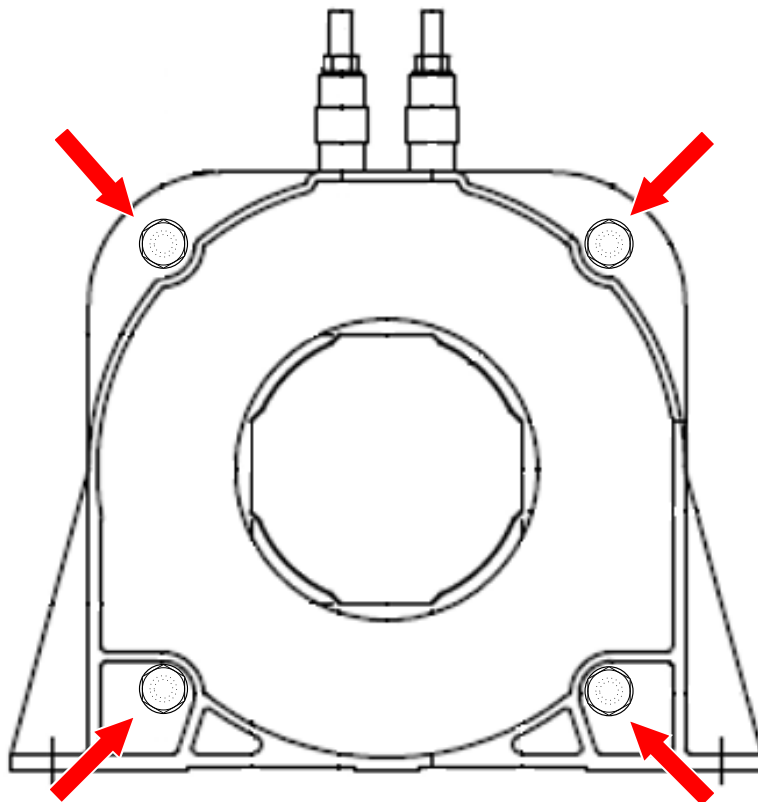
Petercem-transducer M6-screw connection with mounting sheet
